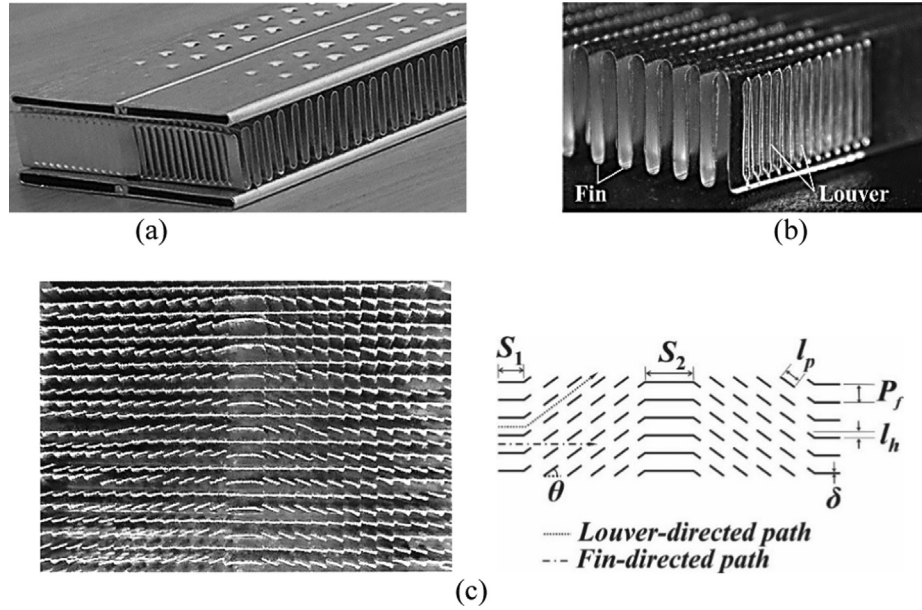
Typical louvered fin and tube configuration in an ACCS heater core: (a) Fins sandwiched between flat tubes, (b) Louvers on the fin surfaces, (c) Cut-away view of the louvered fins and schematic representation of the louvered fin geometry.
